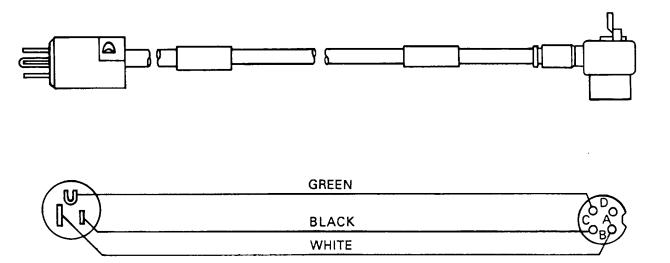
Cable Assembly CX-11948/U, drawing number SM-D-643196.
